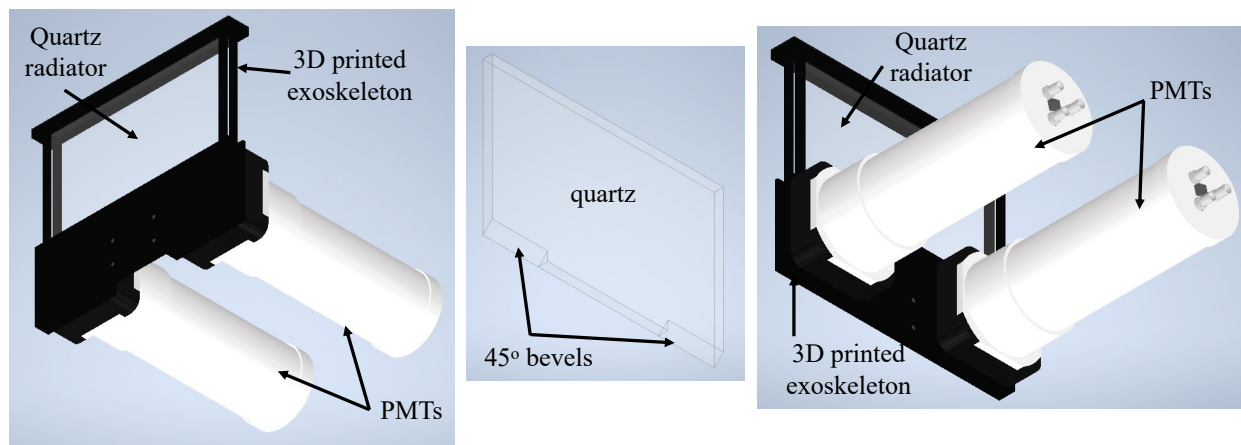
Design views of the large angle monitor (LAM) modules and fused silica radiator.
